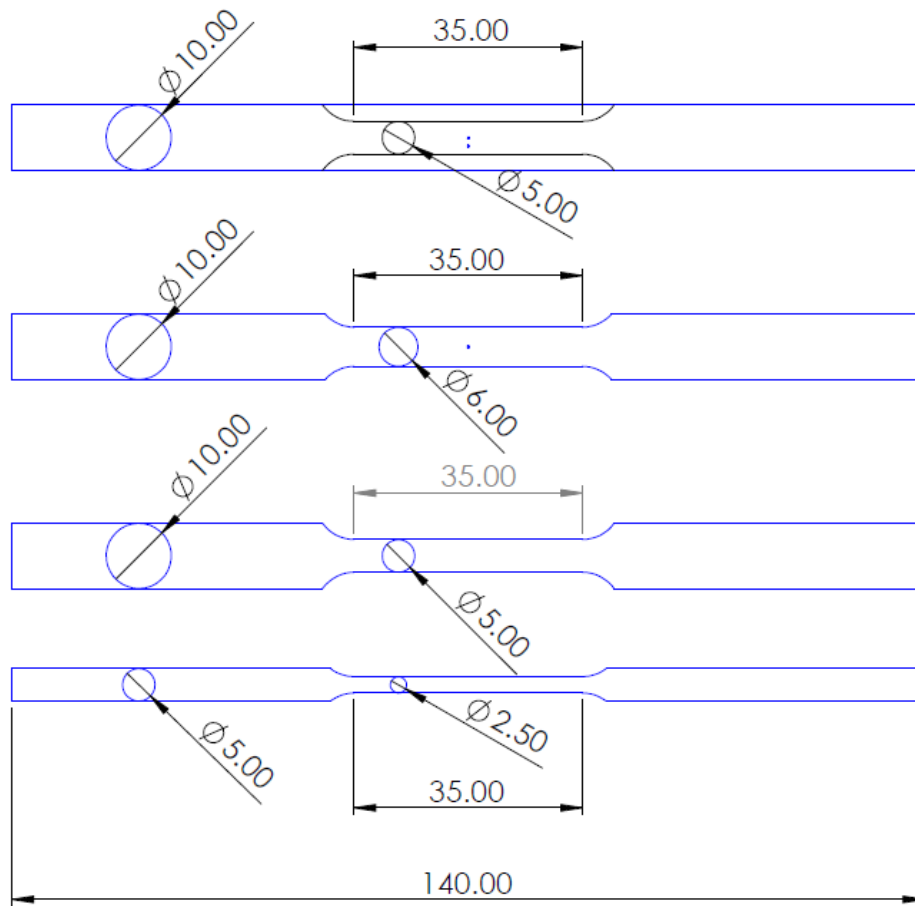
Dog-bone samples geometry: machined, $d=6.0$ mm, $d=5.0$ mm and $d=2.5$ mm.
